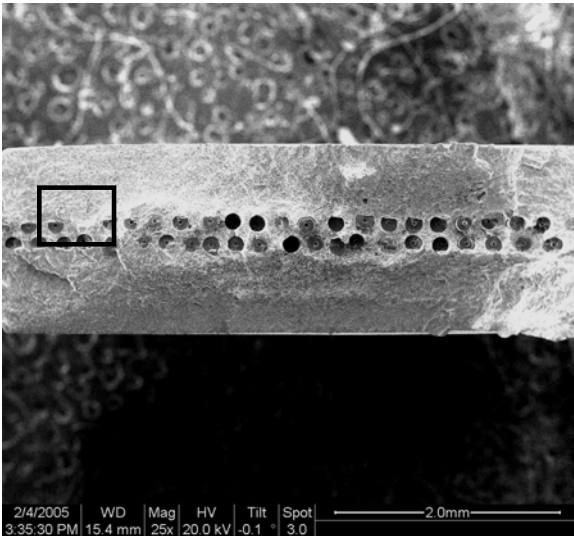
Specimen F/G-06, fracture surface (looking toward alloy side)
